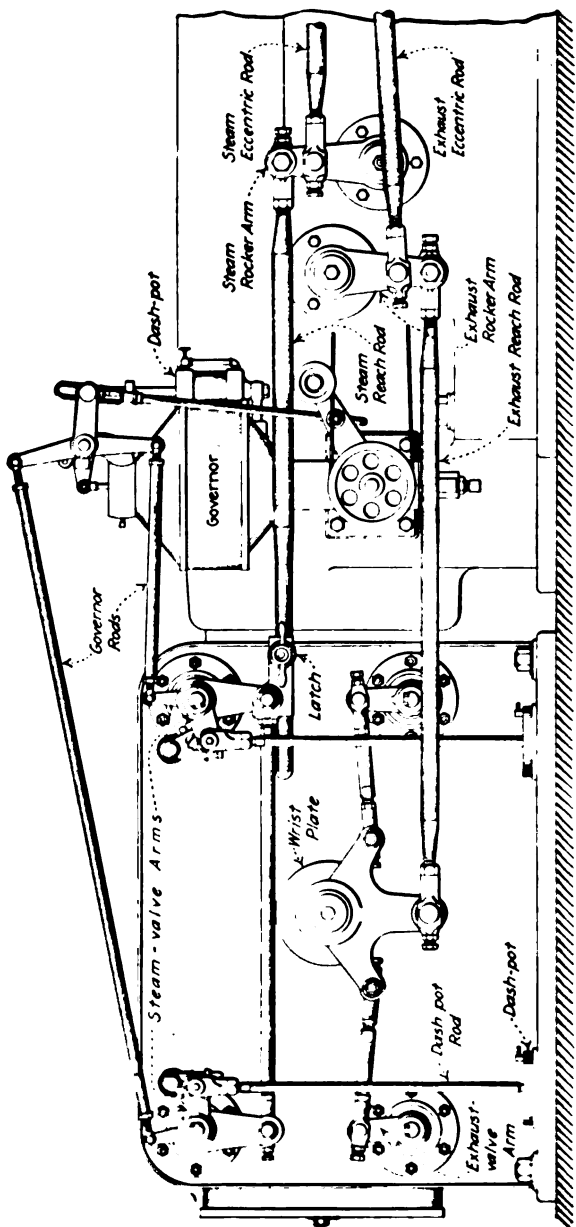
Standard valve gear of Allis-Chalmers heavy-duty Corliss engines. (Note that steam valves are not driven from a wrist plate and that exhaust-valve wrist plate is driven from a point below its supporting pin.)
